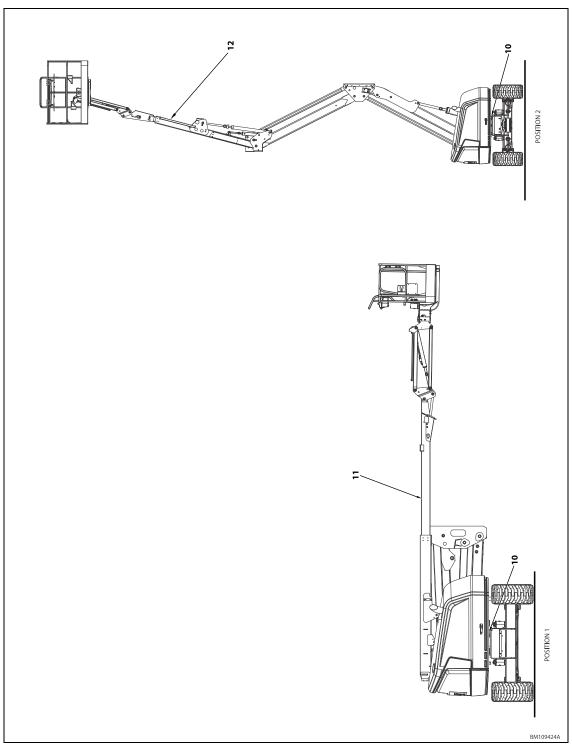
Swing Bearing Tolerance Measurement Location and Boom Placement
